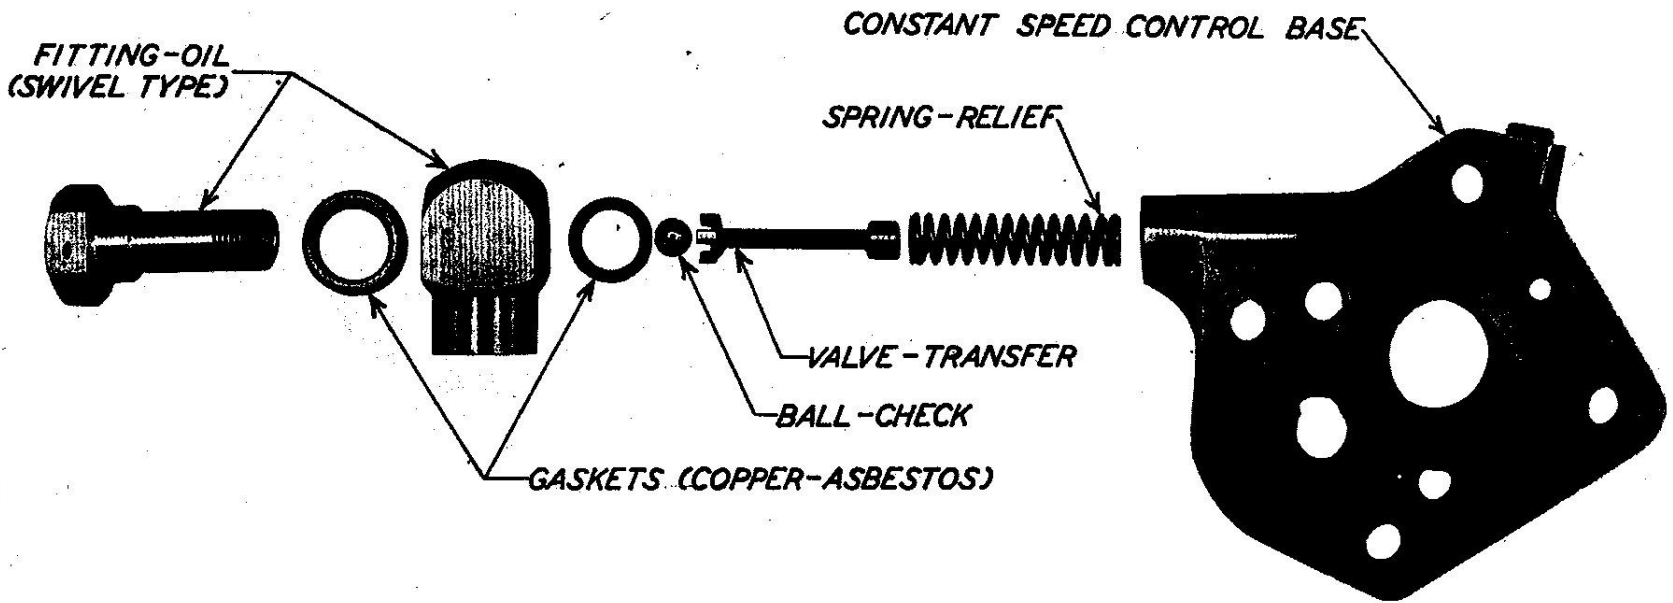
VIEW SHOWING CONSTANT SPEED CONTROL TRANSFER VALVE
